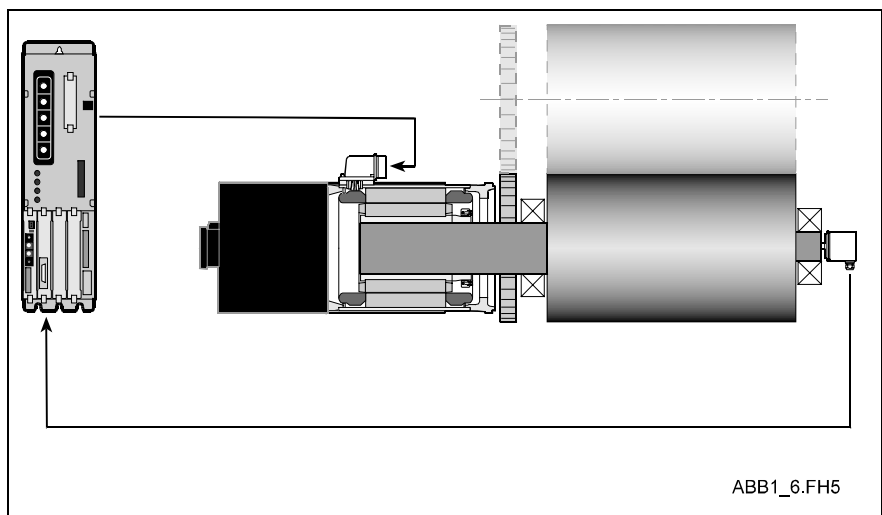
Axle drive with kit roller motor, direct measuring system, e.g., press roller
